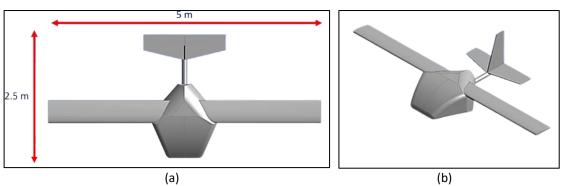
View of UAV model 2 (a) Top view (b) Isometric view
